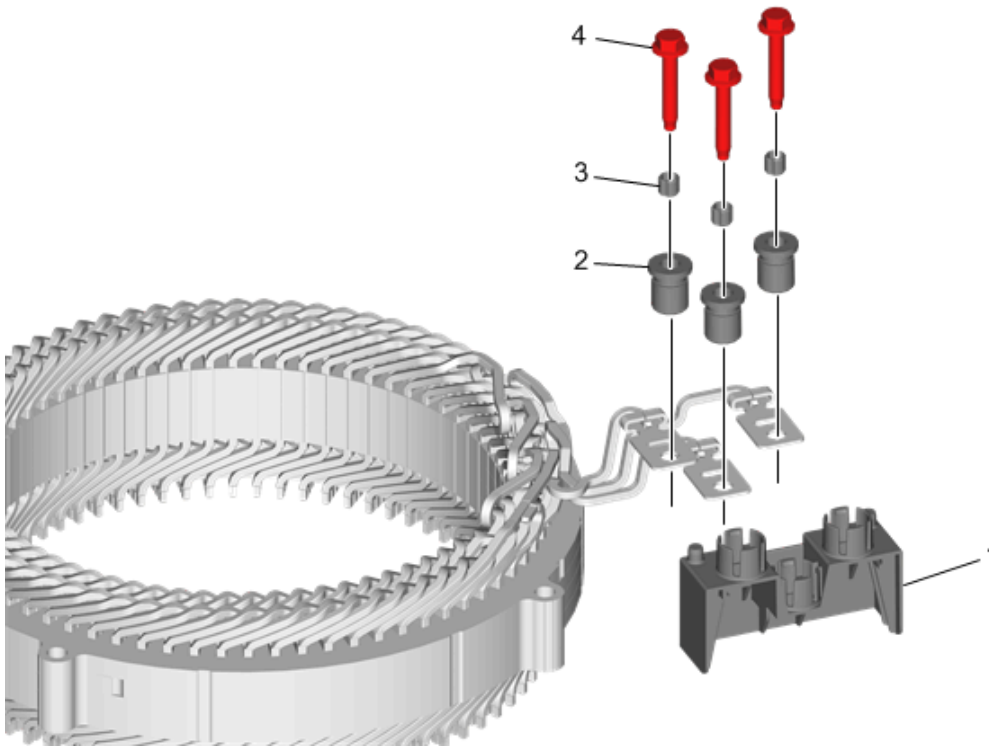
Drive Motor Power Inverter Module Cable Guide
